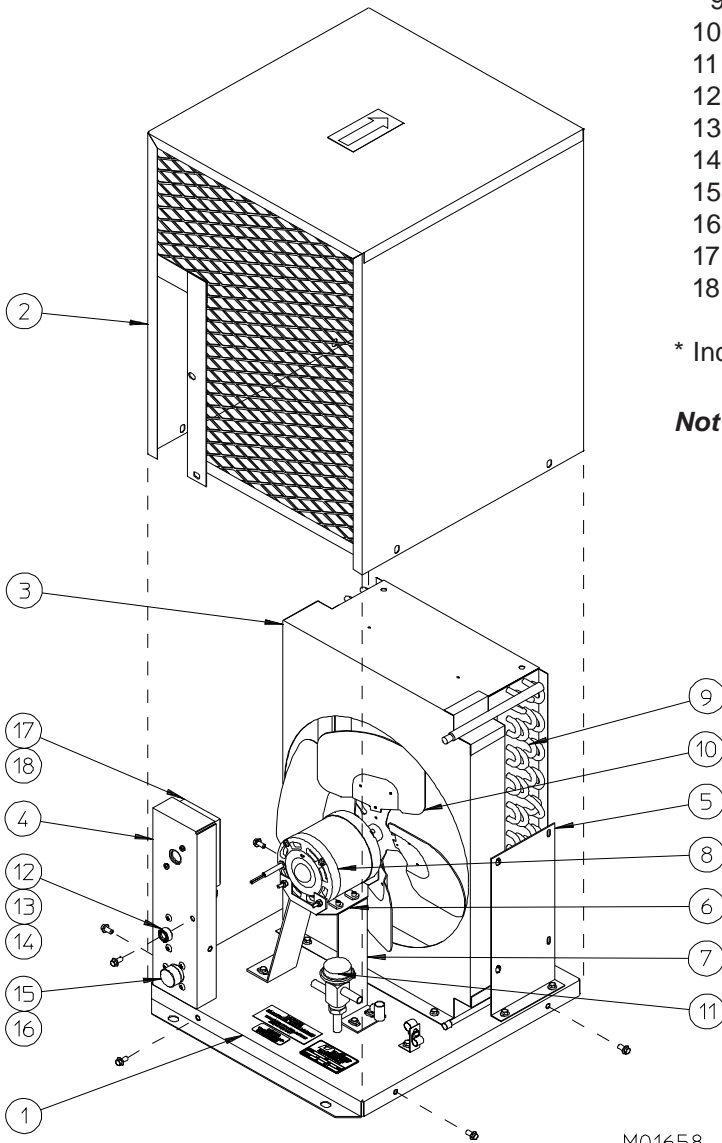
Air Cooled Remote Condenser Assembly (Page 1 of 2)
